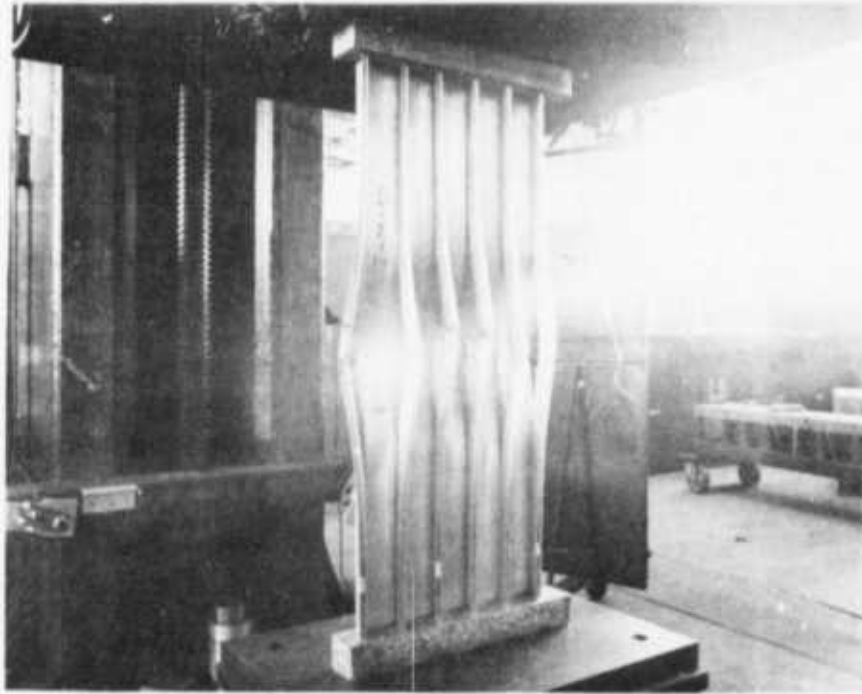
TYPICAL FAILED WELDBONDED COMPRESSION STABILITY PANEL
